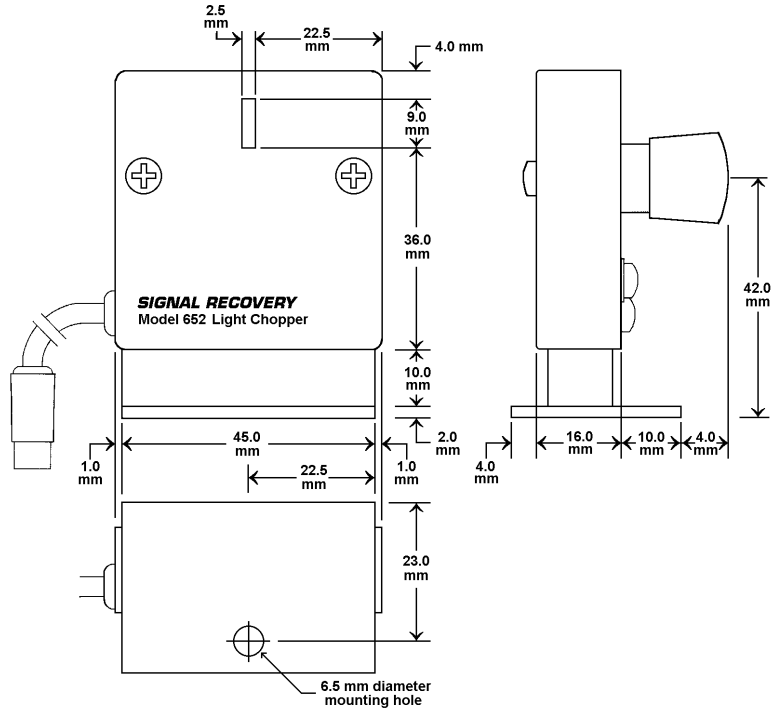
, Model 652-1 Chopper Head Mechanical Dimensions
